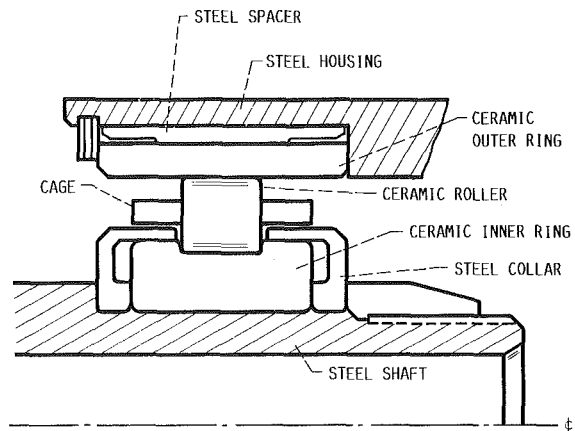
Mounting arrangement of full-complement ceramic roller bearing on a steel shaft, using a steel collar and spacer (Bailey, 1983)
